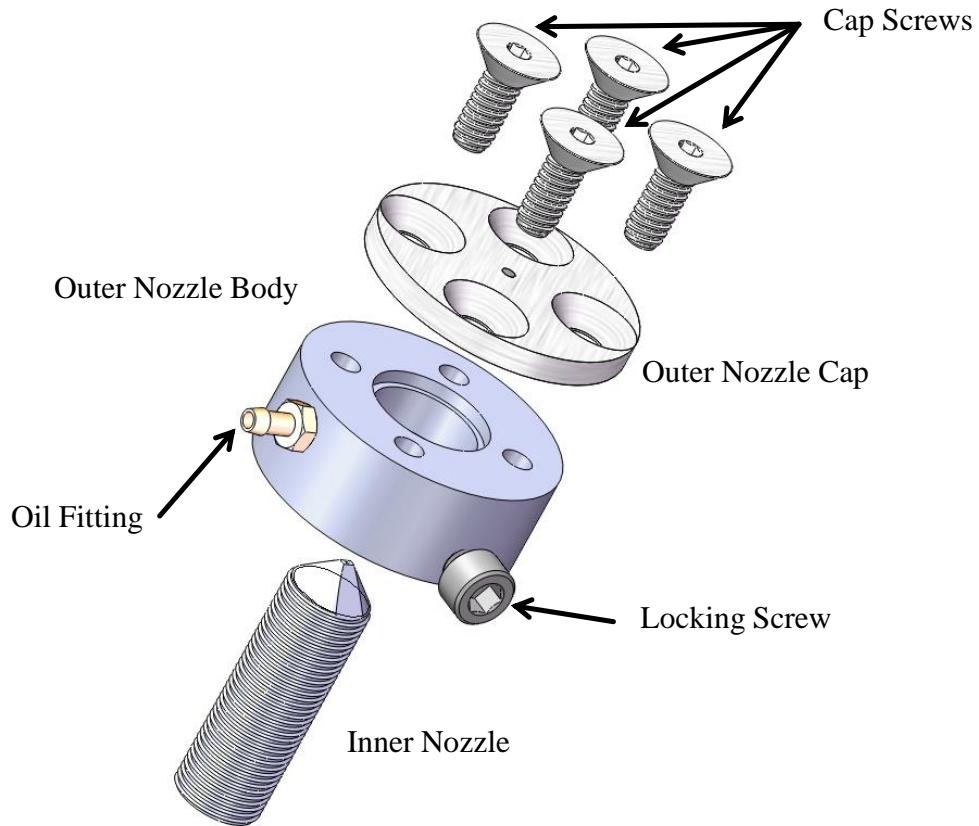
An exploded view, rendered in SolidWorks, of the compound nozzle assembly. The cap screws fix the outer nozzle cap to the outer nozzle body to compose the outer nozzle. This outer nozzle is threaded over the inner nozzle, filled with oil through the oil fitting, and locked in place with the locking screw.
